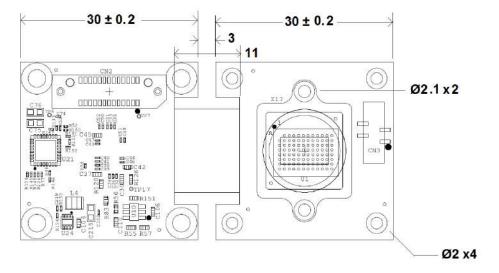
Front View of e-CAM81\_CUONX Module Board Mechanical Dimensions
